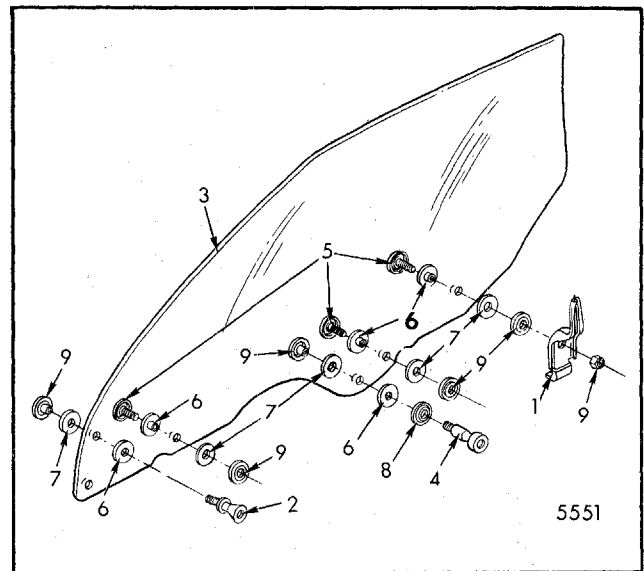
Front Door Window Assembly "A-37, 57 and 80" Styles
